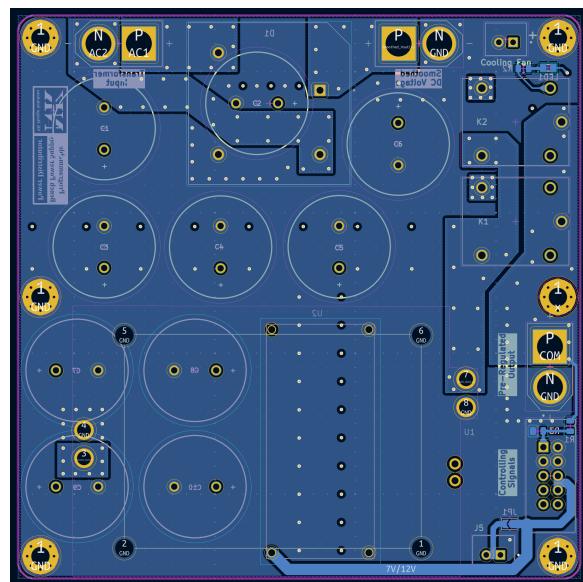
Power Distributor PCB Layout - Bottom Layer
